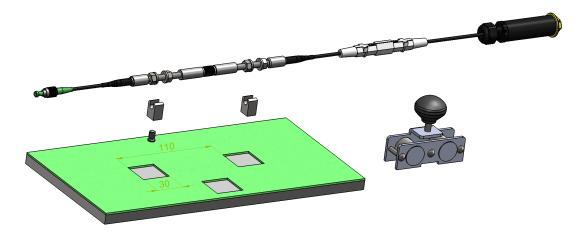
Installation of the mounting brackets MBM-03 M6 version using Indirect and direct welding method
